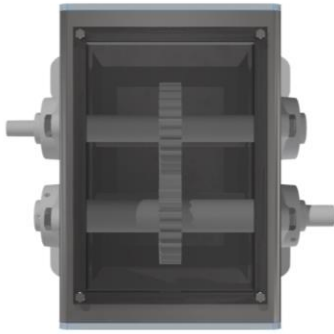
3D model of the dedicated gearbox module with a gear ratio of 1.04 – top view
